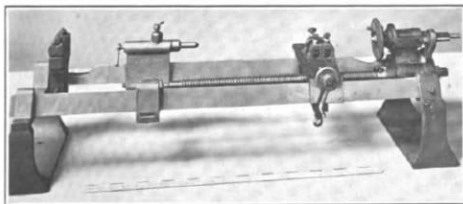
MAUDSLAY'S SCREW-CUTTING LATHE
